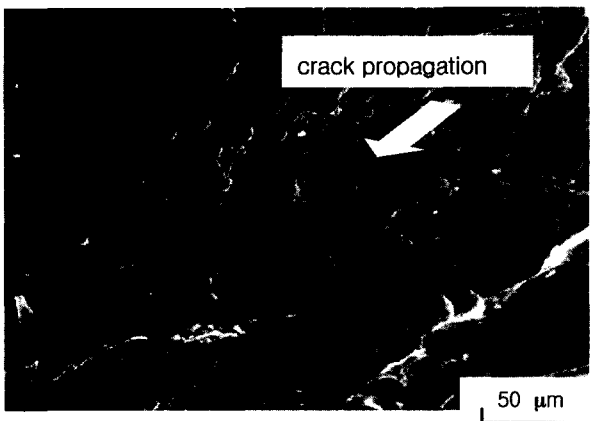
Fatigue crack propagation of messenger wire(SEM)
